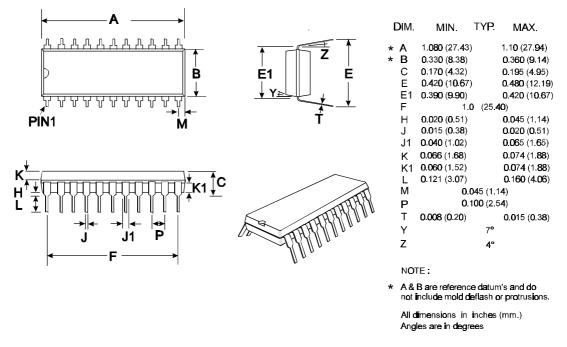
22-pin DIL (P6) Mechanical Outline: Order as part no. CMX612P6
